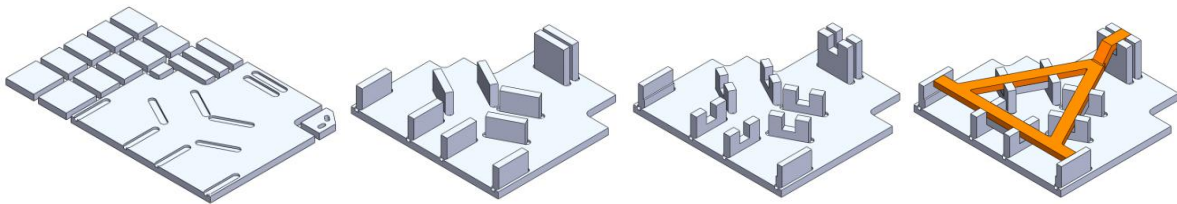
High density fiber board welding fixture for chassis frame. All pieces were CNC cut from a stock sheet of 1.25" thick sheet and glued together before CNC machining the slots used to hold the frame during welding.
